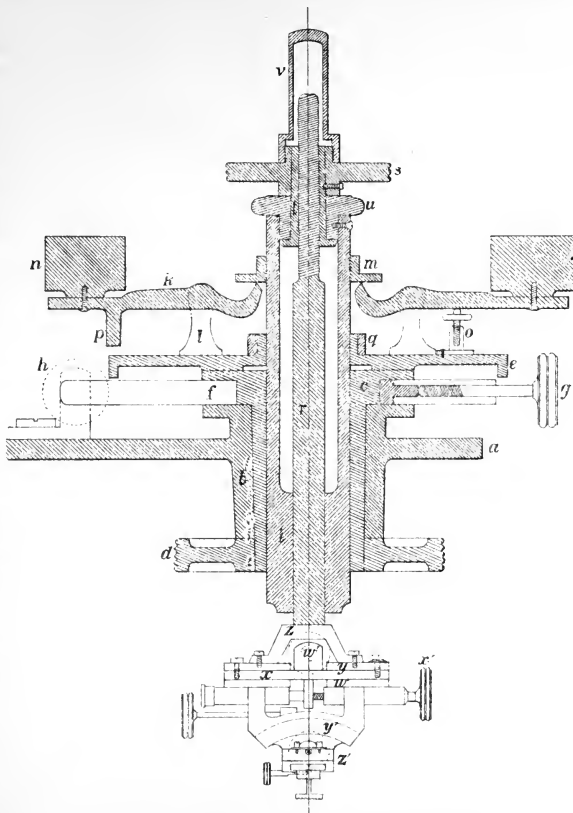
Section of Axial System of Cutting and Grinding Goniometer.
